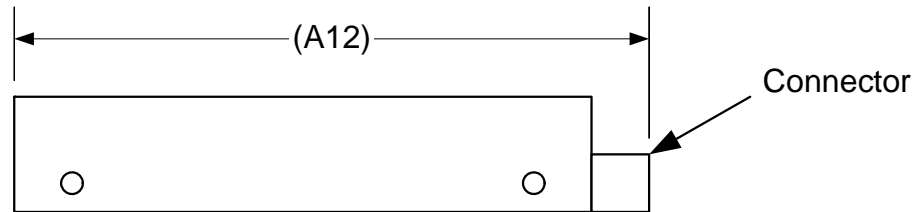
REQUIRED MOUNTING HOLES OF 2.5" DISK DRIVE
